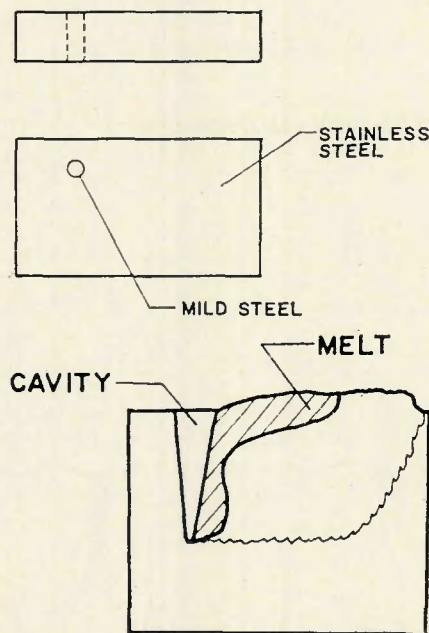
Melt region boundary. Top (a)—introduction of mild steel impurity; bottom (b)—welding pass pattern
